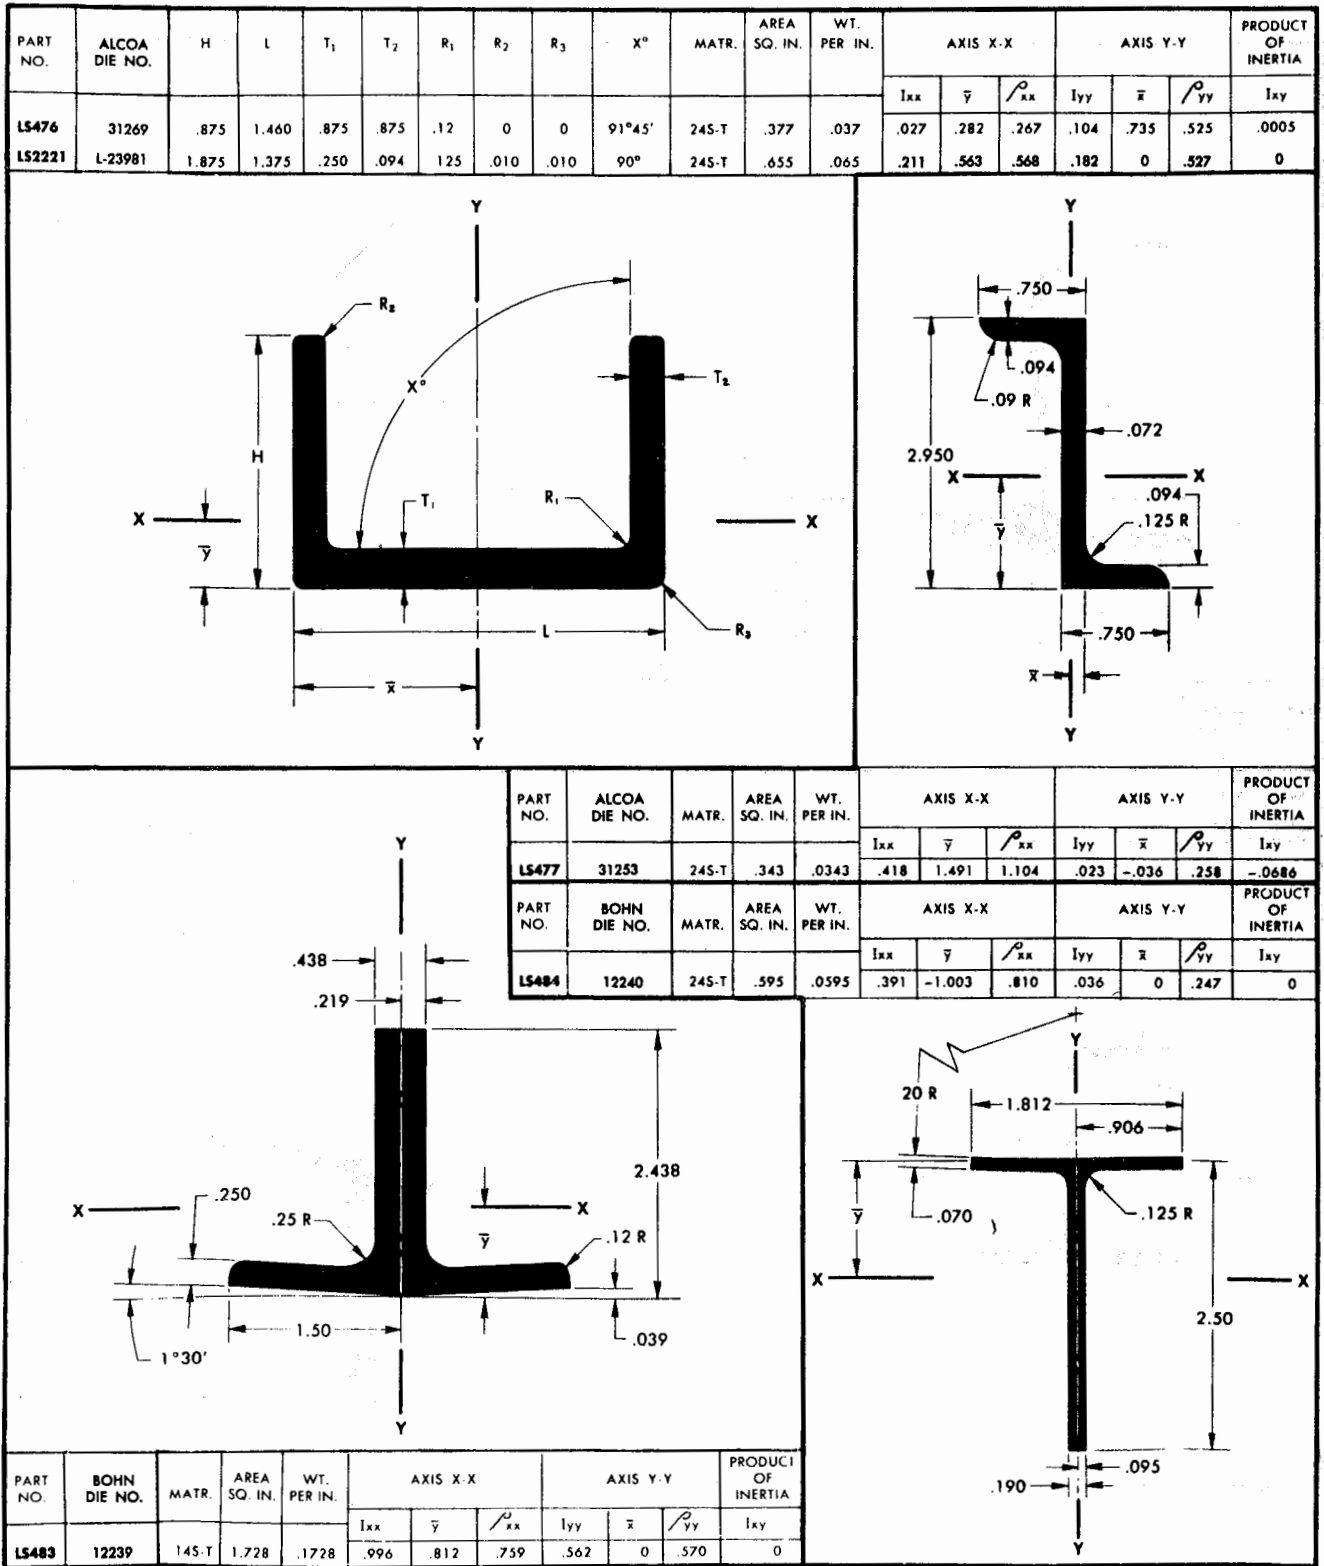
(Sheet 6 of 17 Sheets) — Extruded Standards
